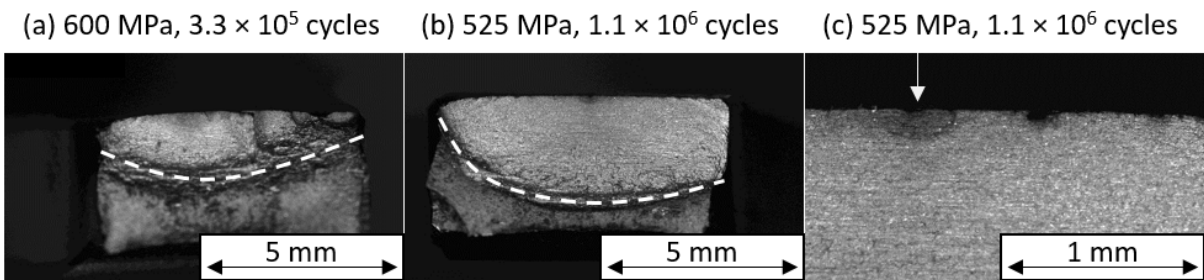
Fracture surfaces of specimens after the fatigue test that underwent laser surface remelting treatment under stereomicroscopy; the fatigue fracture surface and area, where the final rupture occurred are separated with a dotted white line. (a) LCF fracture with multiple crack fronts, (b) HCF fracture with a single crack origin and (c) enlargement of the origin from (b). The white arrow designates the origin point of the crack. [19]
